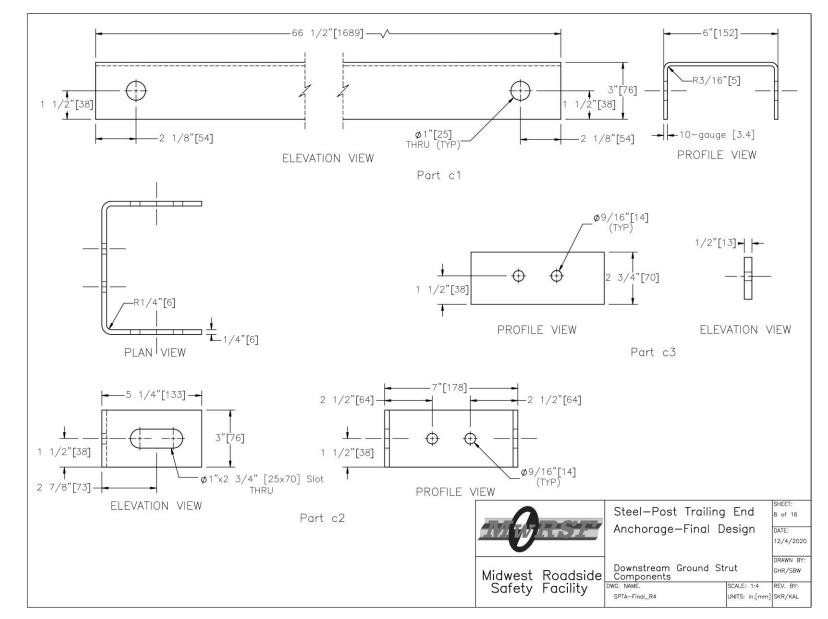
Steel-Post Trailing End Anchorage, Downstream Ground Strut Components
